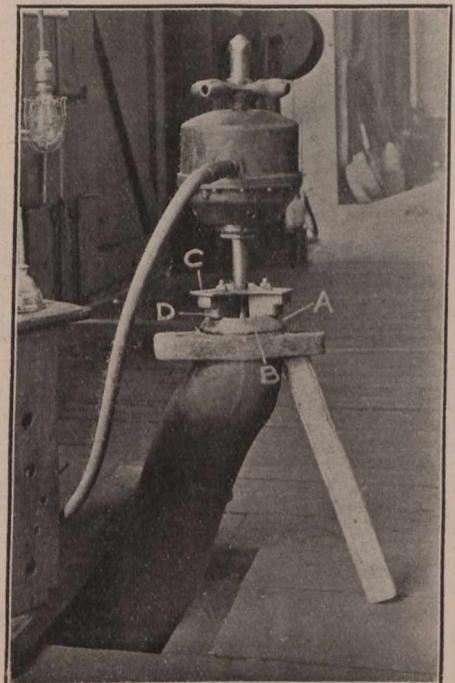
Grinding the Ball Seat in the Smoke-Box Steam Pipe.
